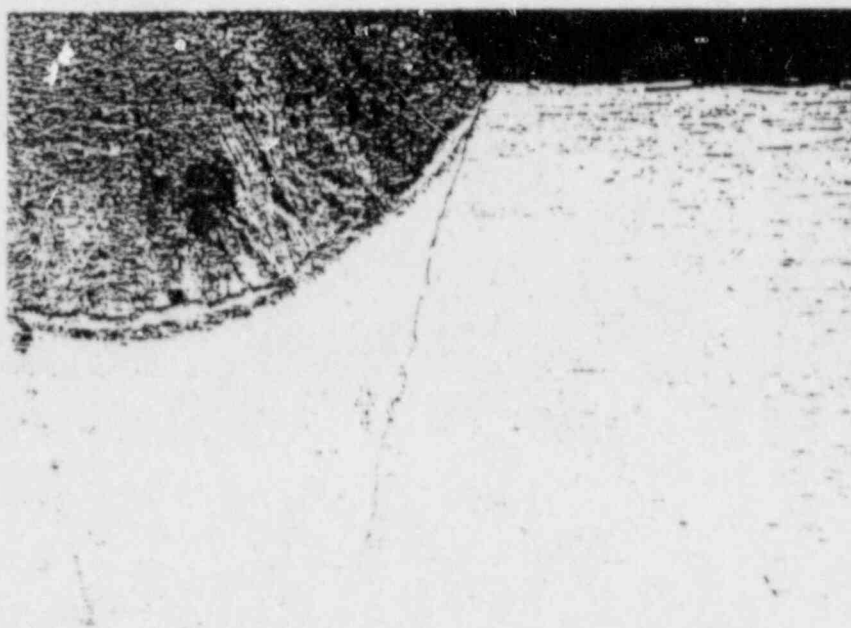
Close-up photograph of specimen used for SEM. Oxidation of fracture surface is heavier (darker) near OD at crack center and becomes lighter closer to the ID and crack front.
